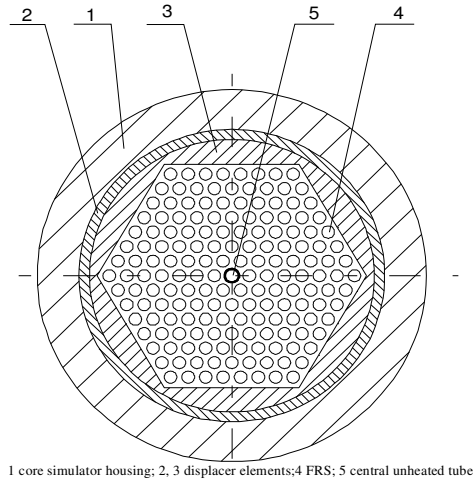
Cross-sectional view of the Fuel Rod Simulator bundle
